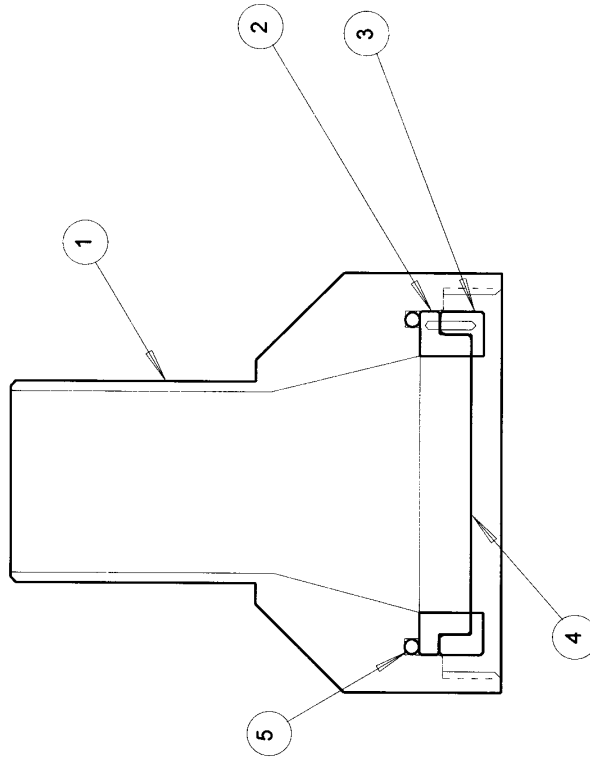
FILTER HOLDER, ASSEMBLY
